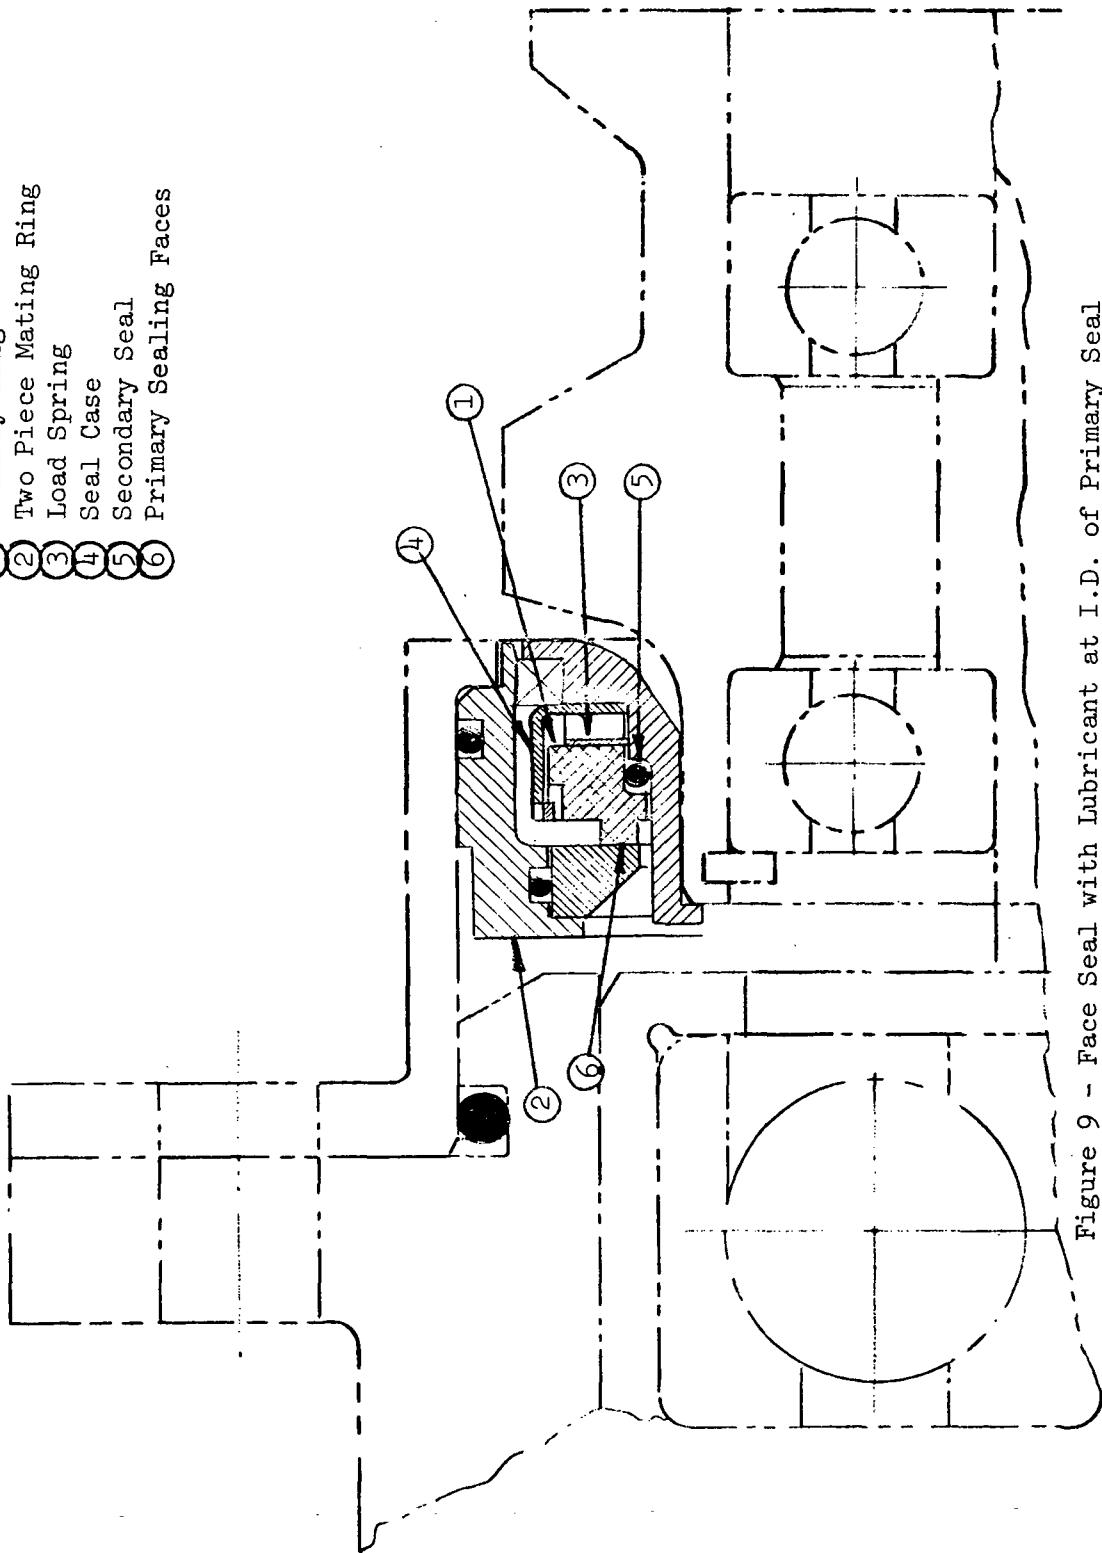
Face Seal with Lubricant at I.D. of Primary Seal
